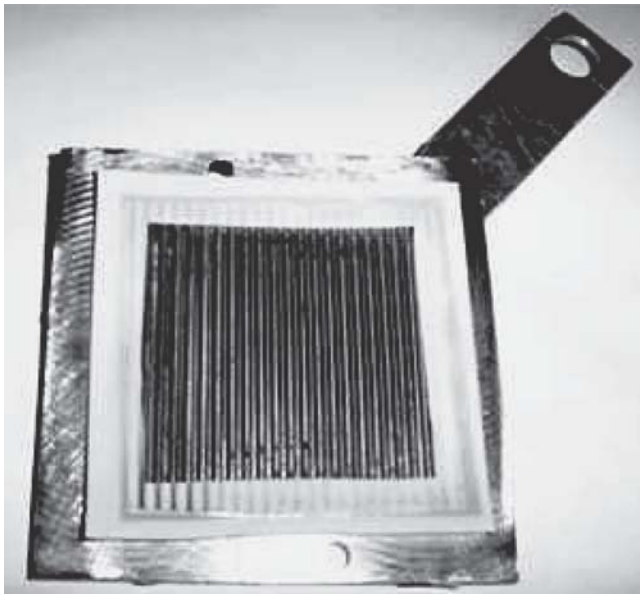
Corrugated sheet bipolar plate with machined SS-316 supporting plate
